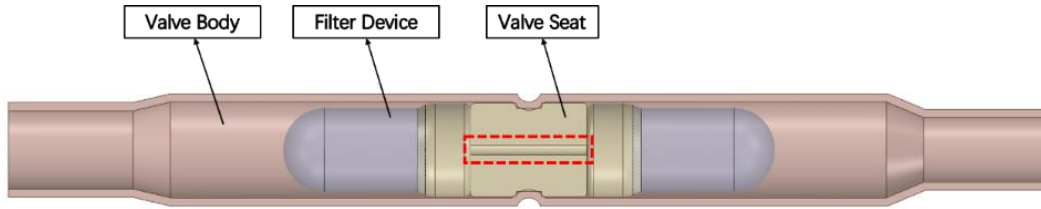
Three-dimensional geometry of a short tube throttle valve
